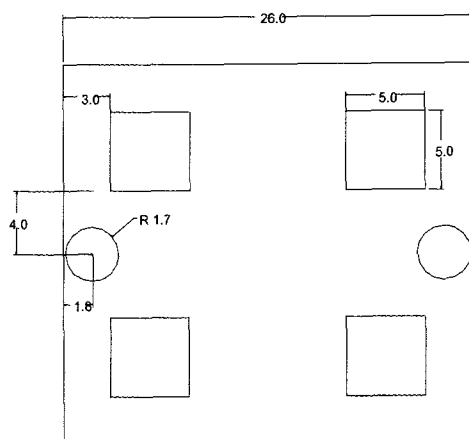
Channel 3 - Final design used. Alignment holes added to match with fixturing device
